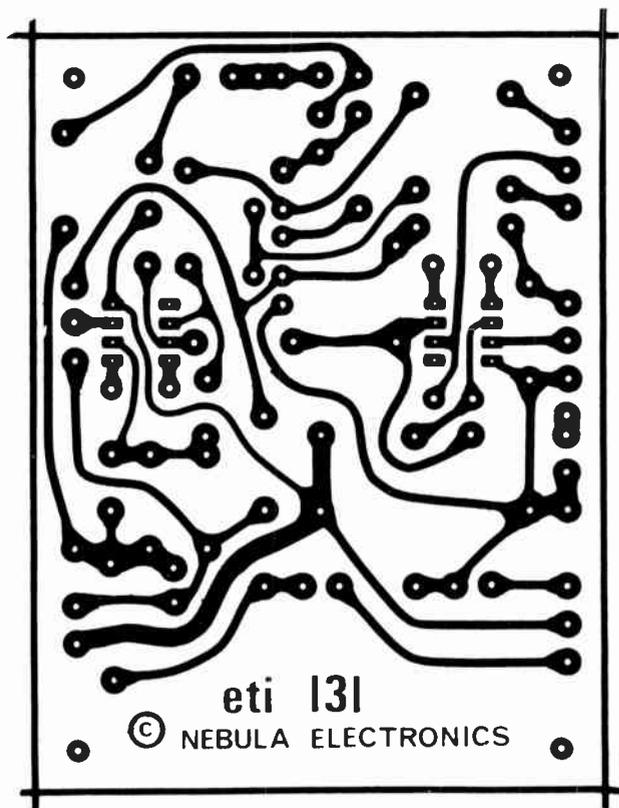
Printed-circuit board layout for the power supply. Full size 100 x 75 mm.
